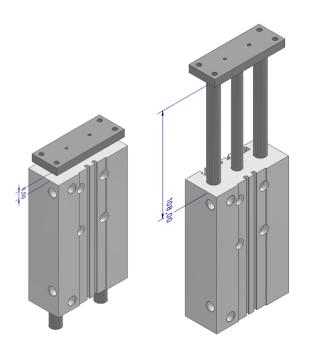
Image on Autodesk Inventor of four blocks of lineal guideways joined by a plane. Dimensions in mm.
